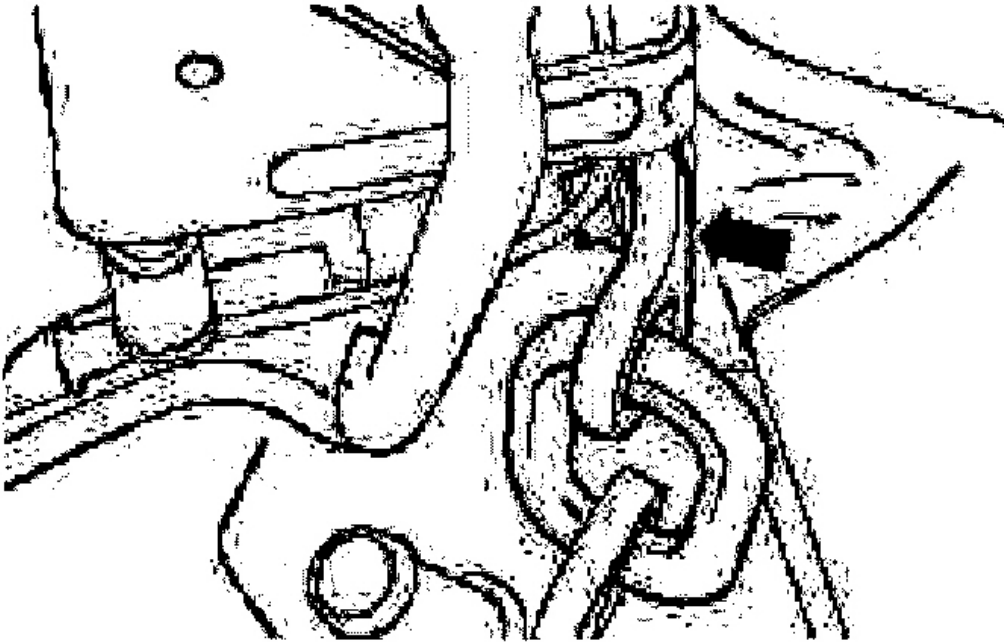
Removing Right-Hand Transaxle Flange Bolt
